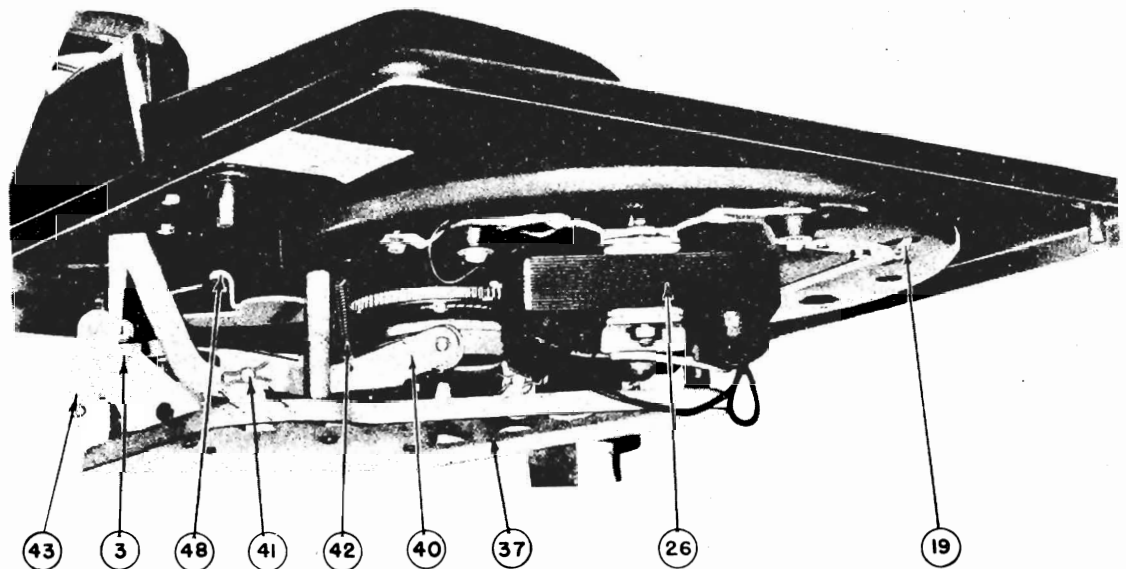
PARTS LOCATION -- LEFT SIDE VIEW
